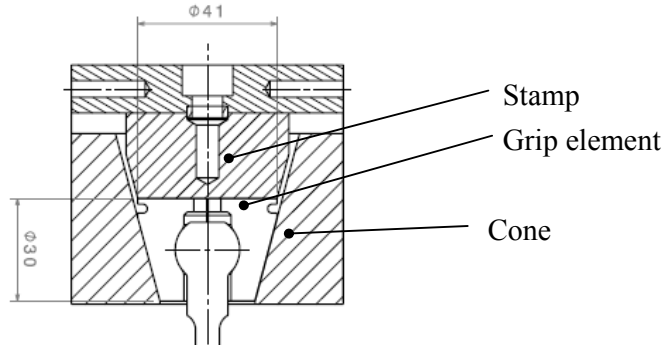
Cross sectional view of the fixture for tension-compression tests.
